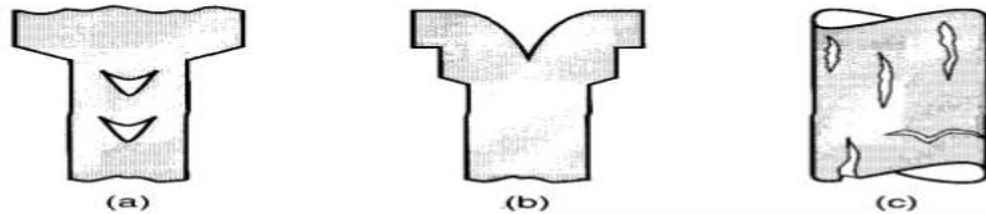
Extrusion defects (a) Internal cracking [Cocks and Ashby, 1980], (b) Piping [Tang et al., (1994)], (c) Surface cracking [Lee et al., (1973)]
